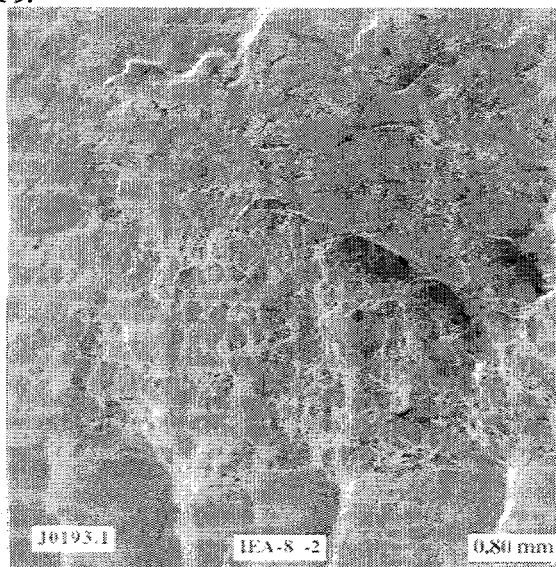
Fracture Surface of Specimen IEA-8 Showing the Fatigue Surface at the Bottom.
